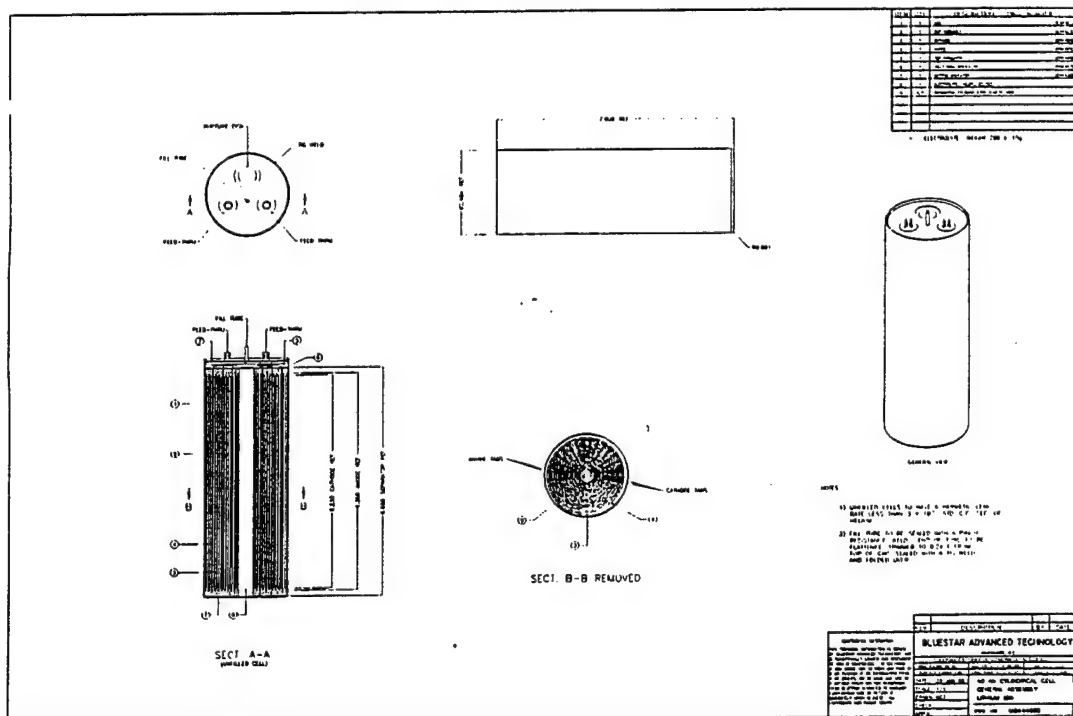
General assembly drawing for 45-Ah cylindrical cell.
